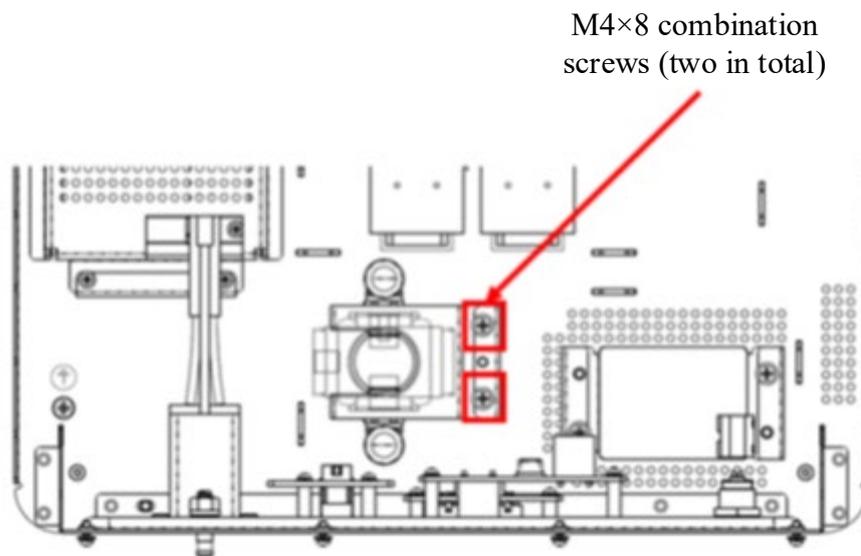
Disassembling the Low-pressure Valve Assembly
